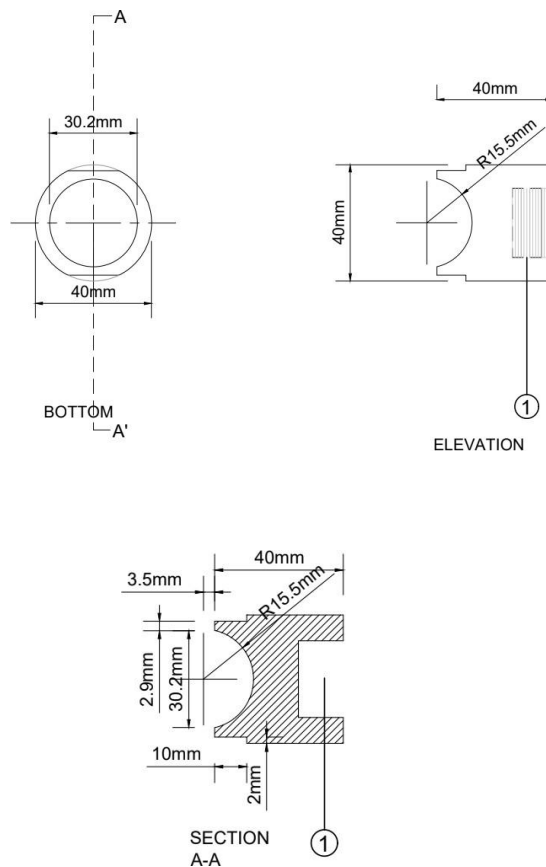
Drawings representing the different views of the manufactured connection. These exact drawings were sent over to the engineering faculty to manufacture the connection from a mild steel cylindrical bar. The numerical label 1 refers to an M24 2mm thread
